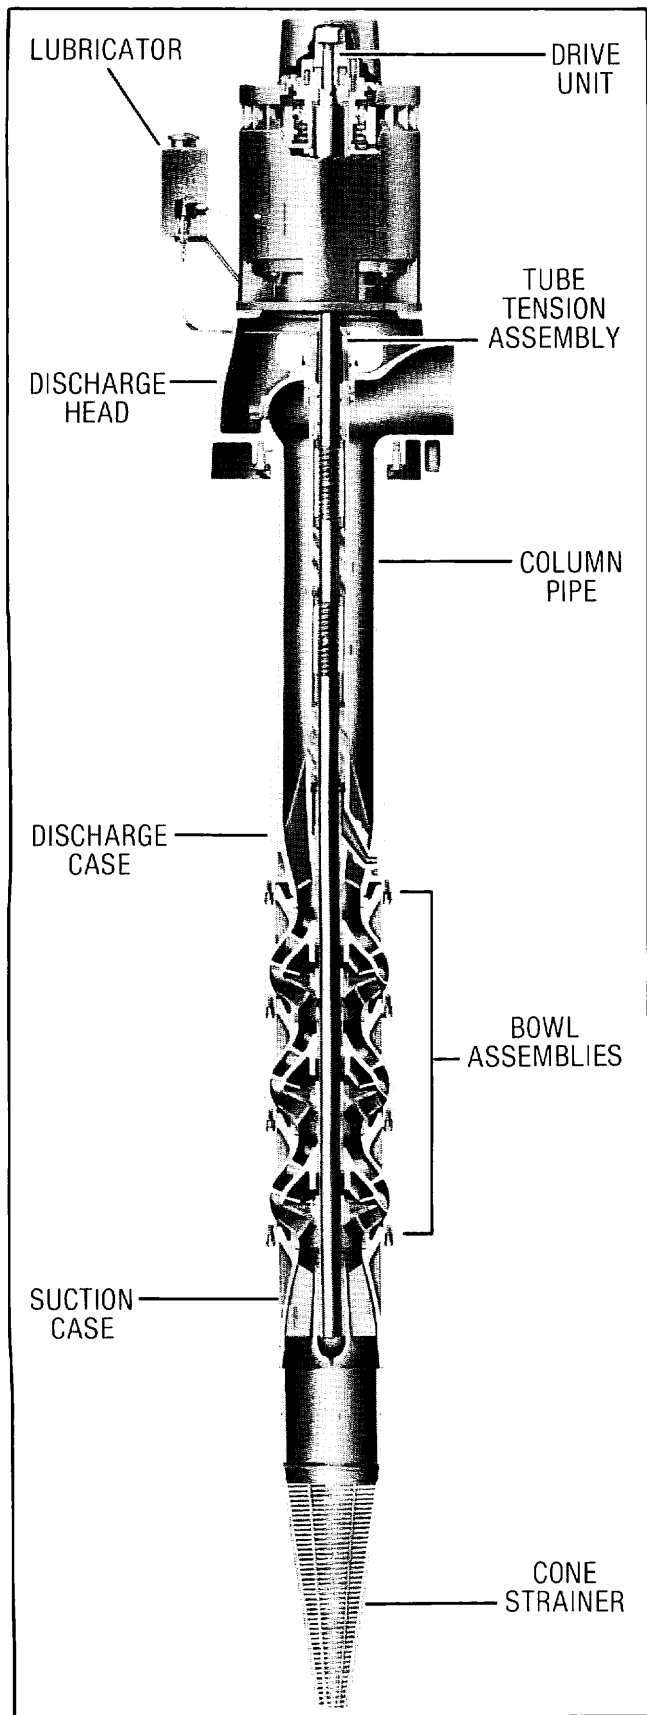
Deep Well Turbine Pump - Enclosed Lineshaft Configuration
